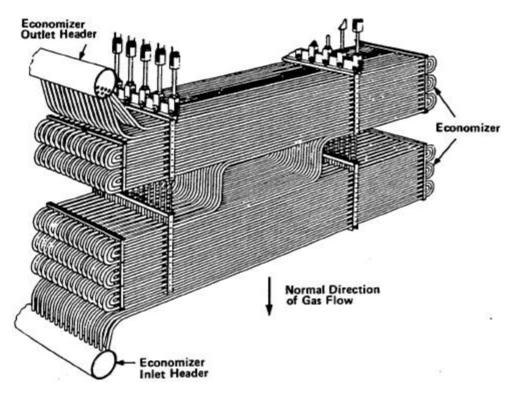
Water Tube Economizer Designed for a Power Boiler [6]
